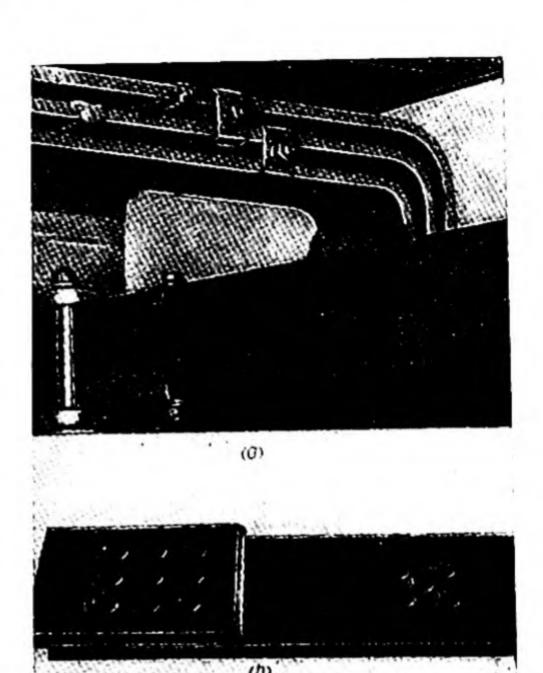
Busbar jointing: a-by a-c welding; b-by pressure welding (indentation for diffusion bonding)
